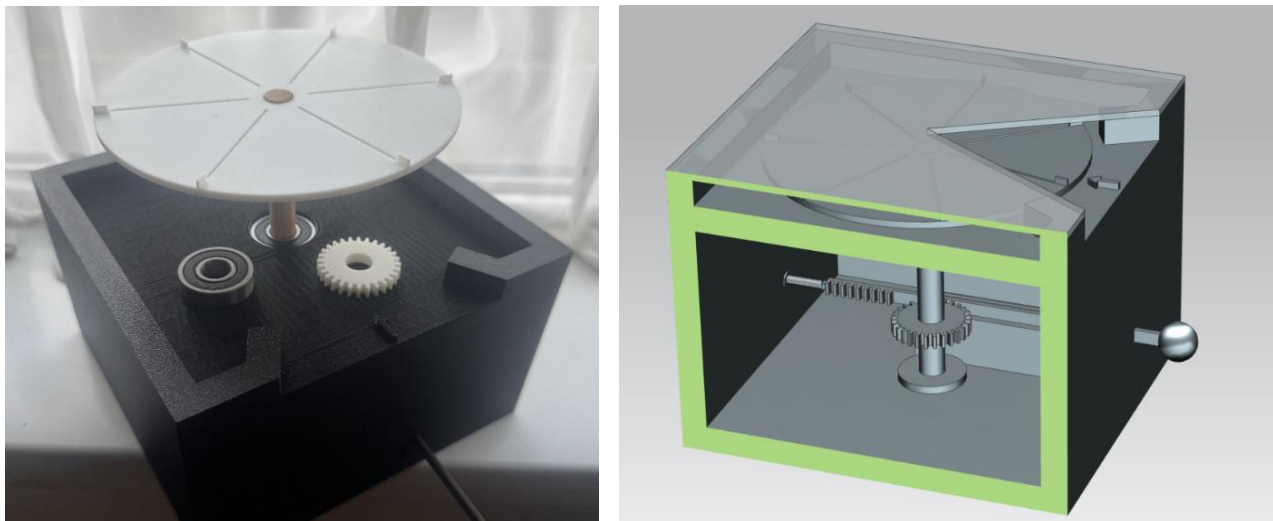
Internal view of the Game Spinner System and the assemble drawing
